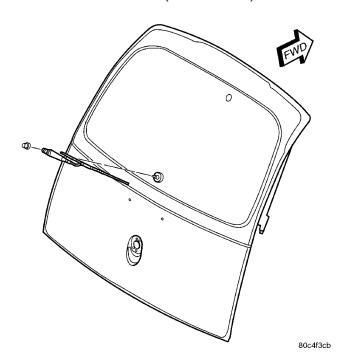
REAR WIPER ARM - REMOVE/INSTALL
